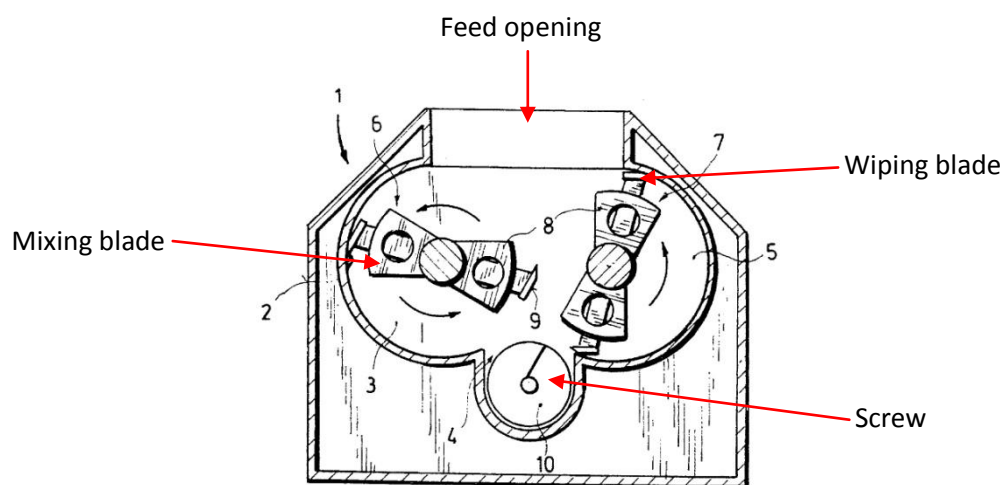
Cross-sectional view of the Conching Machine [40]
